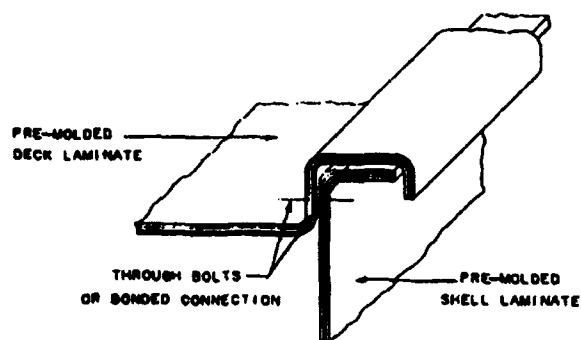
Simple Molded-In Coaming with Mechanical Fastenings [Gibbs and Cox, *Marine Design Manual for FRP*]
